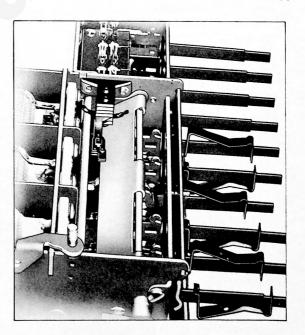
REMOVING GEARS TO LEFT OF CENTER-SUPPORT BEARING
